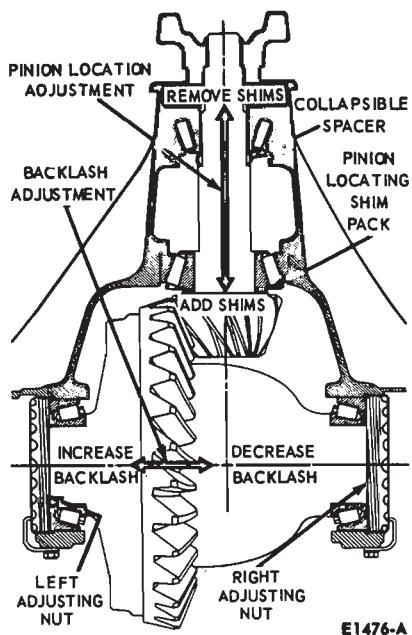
Pinion and Ring Gear Tooth Contact Adjustment—Integral Carrier Type Axles
